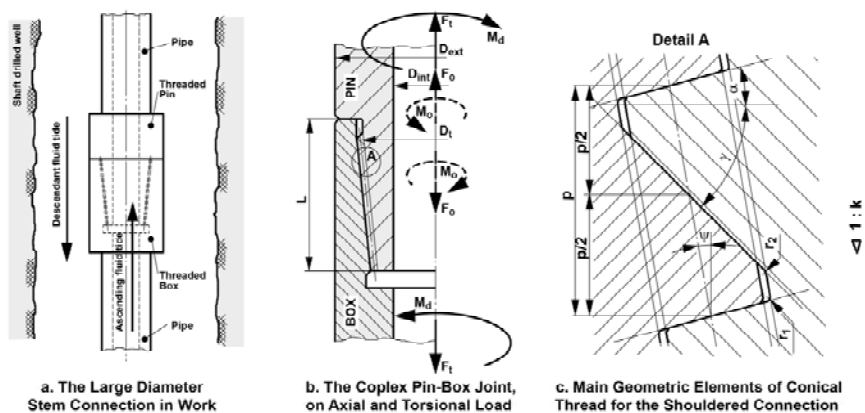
The special conical thread shouldered connection used for the large diameter drilling stem joints
